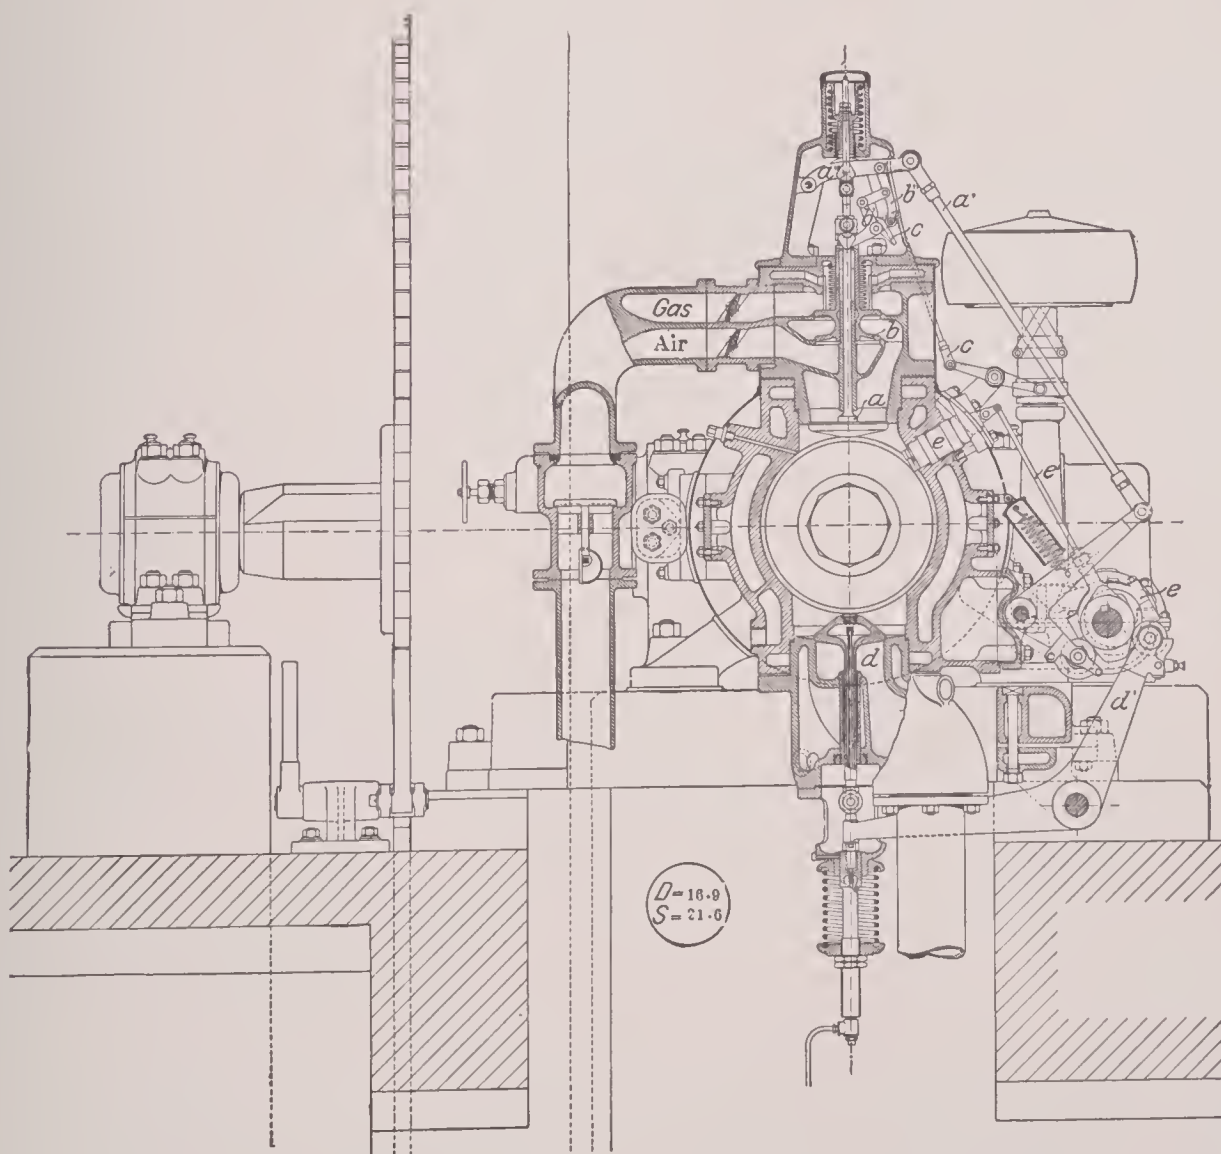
Valve Gear for a 100 H.P. Double-acting 4-cycle Engine, Langen & Wolf, Vienna.
